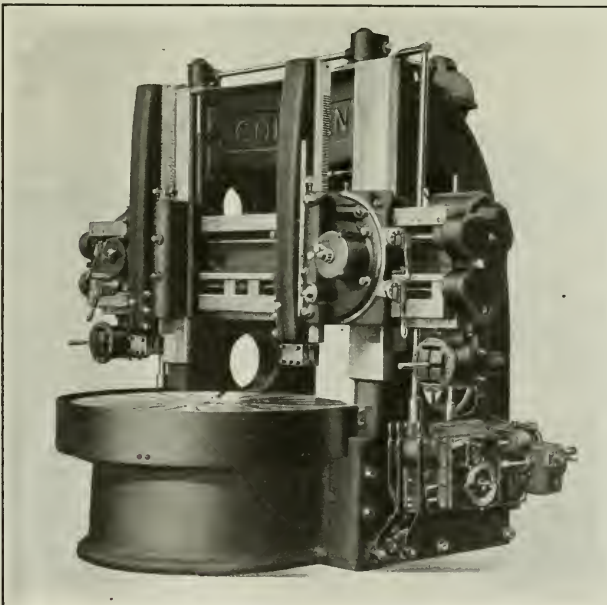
Heavy-duty Vertical Boring and Turning Mill made by the Colburn Machine Tool Co.
